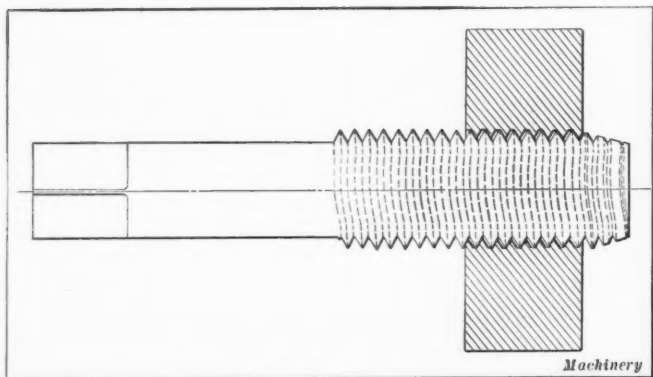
Tap with So-called "Drunken" Thread, which cuts unevenly and produces Oversize and Roughly Threaded Holes
